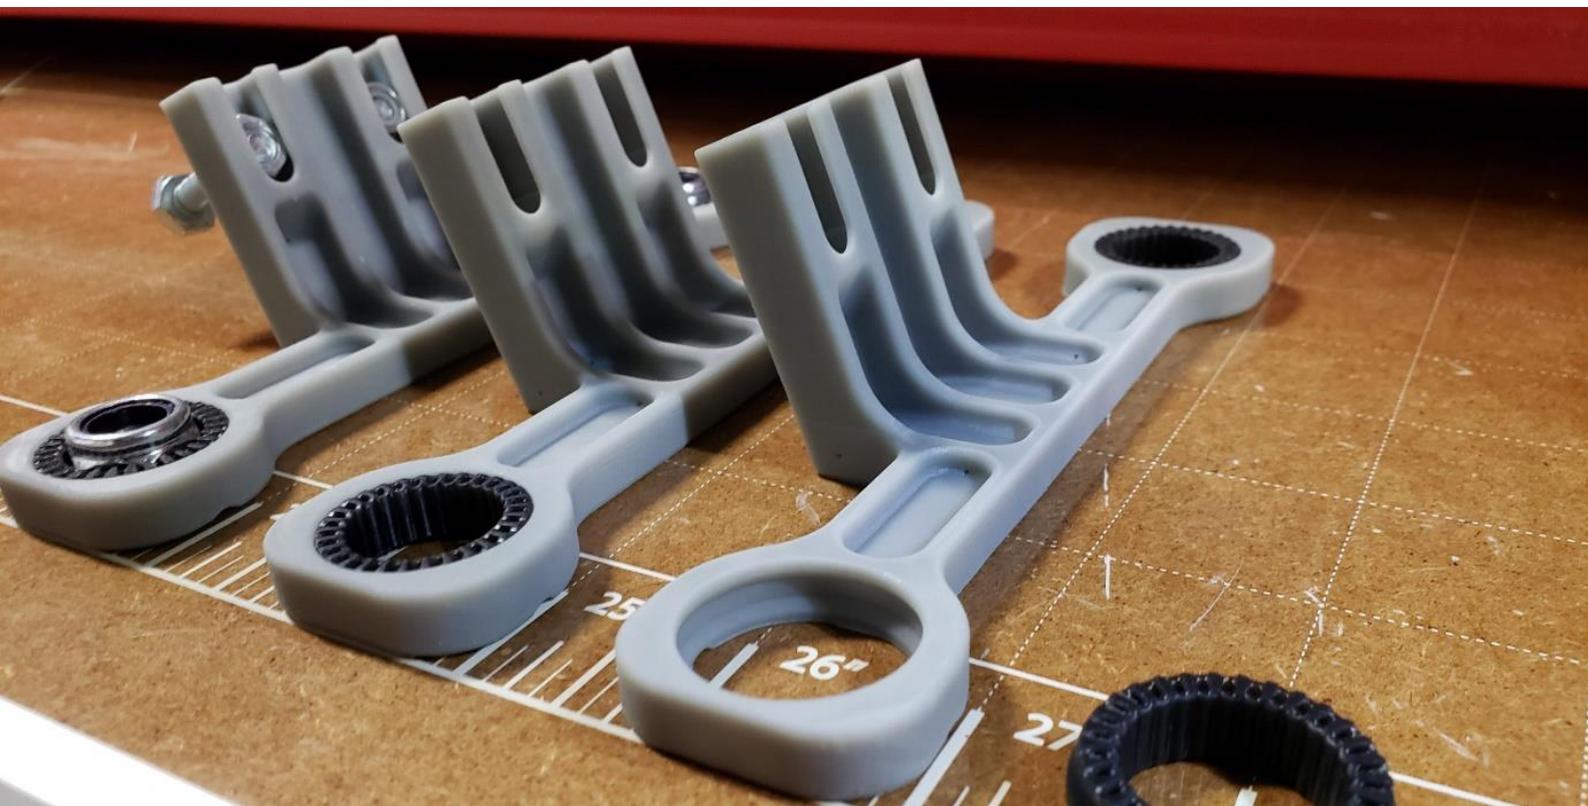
D-printed go-kart parts printed in engineering resins Strong-X and Tough-X resin for the Torque Off Road TQ390.
